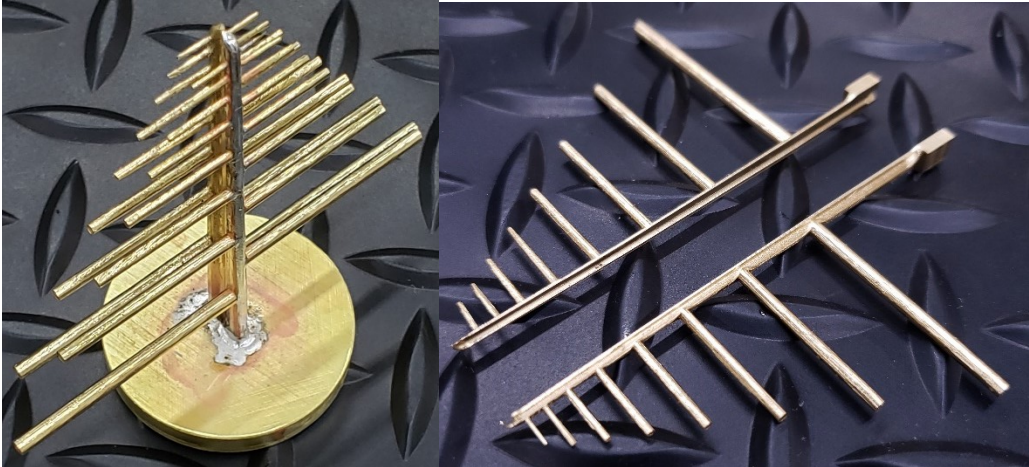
View of design milled from brass, and view of milled hollow boom.
